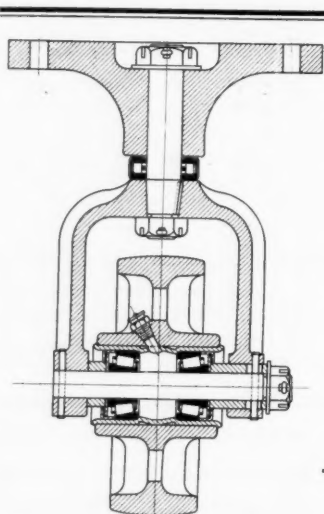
Bearing Mounting for Industrial Truck Wheels
